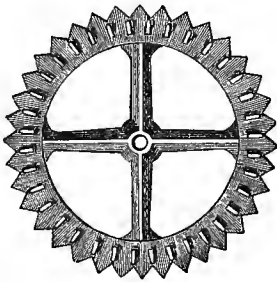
Side view of one wheel of the clod-crusher.
